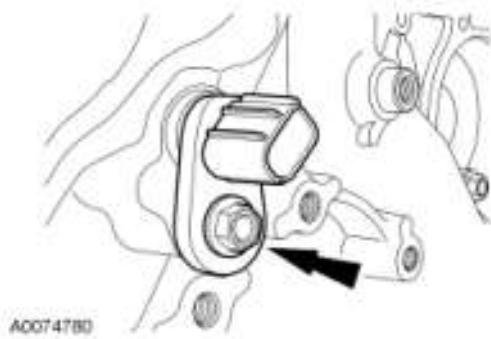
Locating Camshaft (CMP) Sensor Bolt
